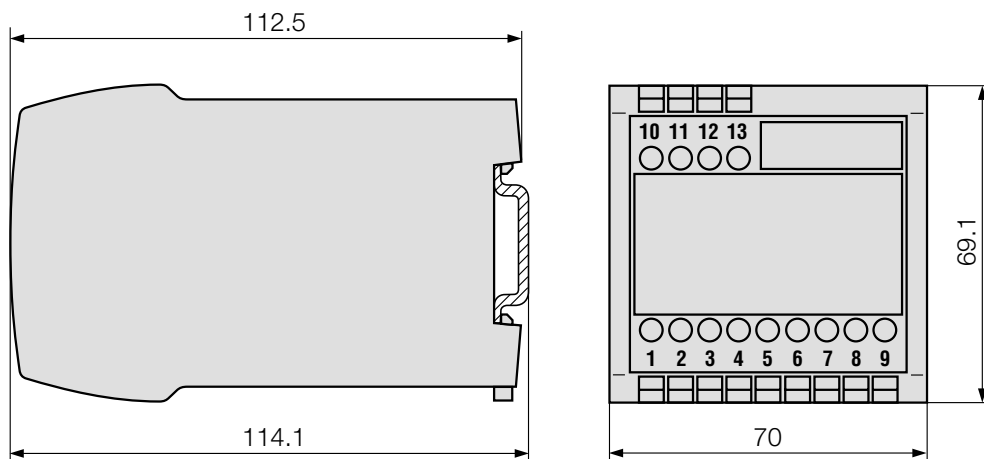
SINEAX U 553 in housing P13/70 clipped onto a top-hat rail (35 × 15 mm or 35 × 7.5 mm, acc. to EN 50 022).
